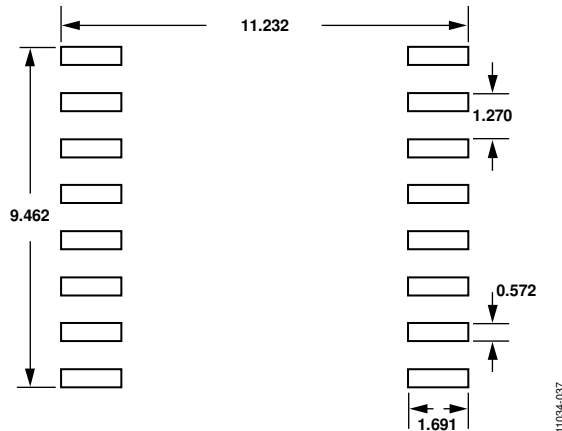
Sample SOIC Solder Pad Layout (Land Pattern);
